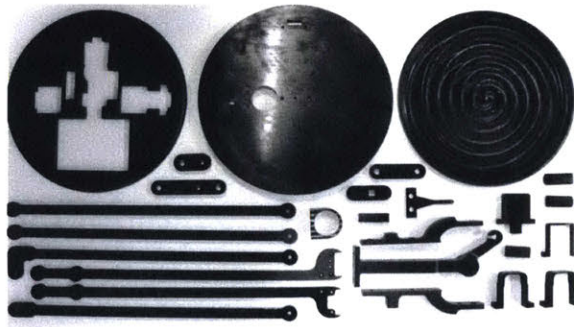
LuminAR BlackJack fabricated parts before assembly
